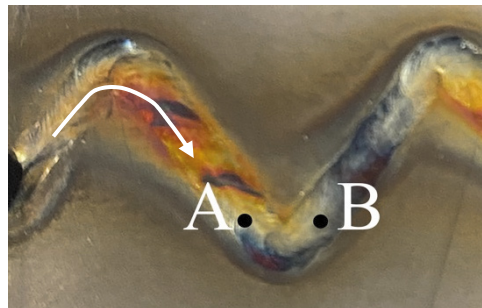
‘Zig-zag’ welding with point A and point B undergoing post and pre heating.
